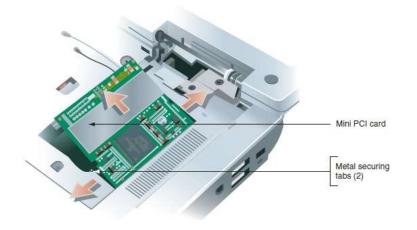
Remove a Mini PCI Card Courtesy: Course Technology/Cengage Learning
